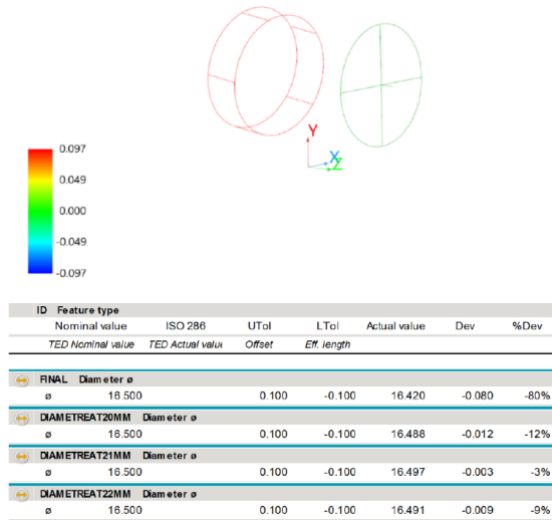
Measurement of the inner diameter using a coordinate measuring machine.
